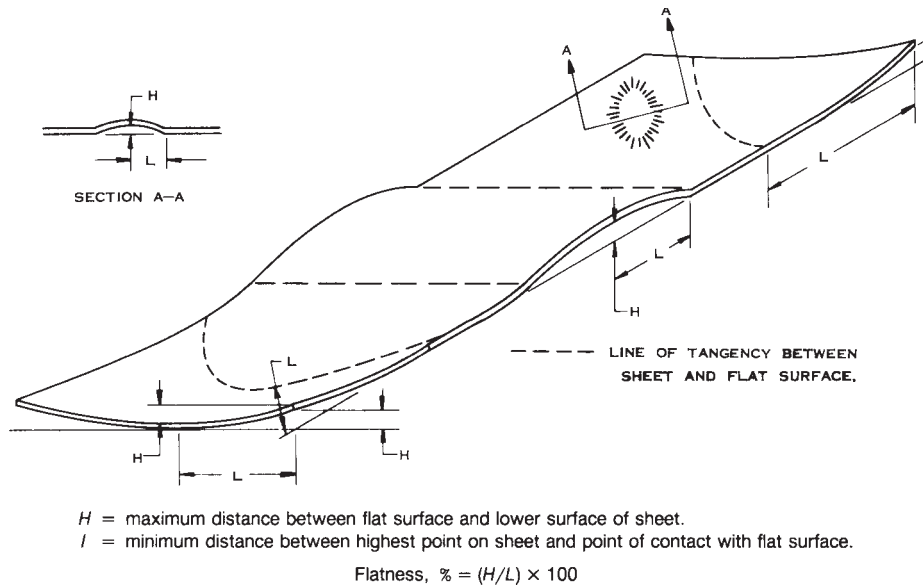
Plate and Sheet Flatness Tolerances
